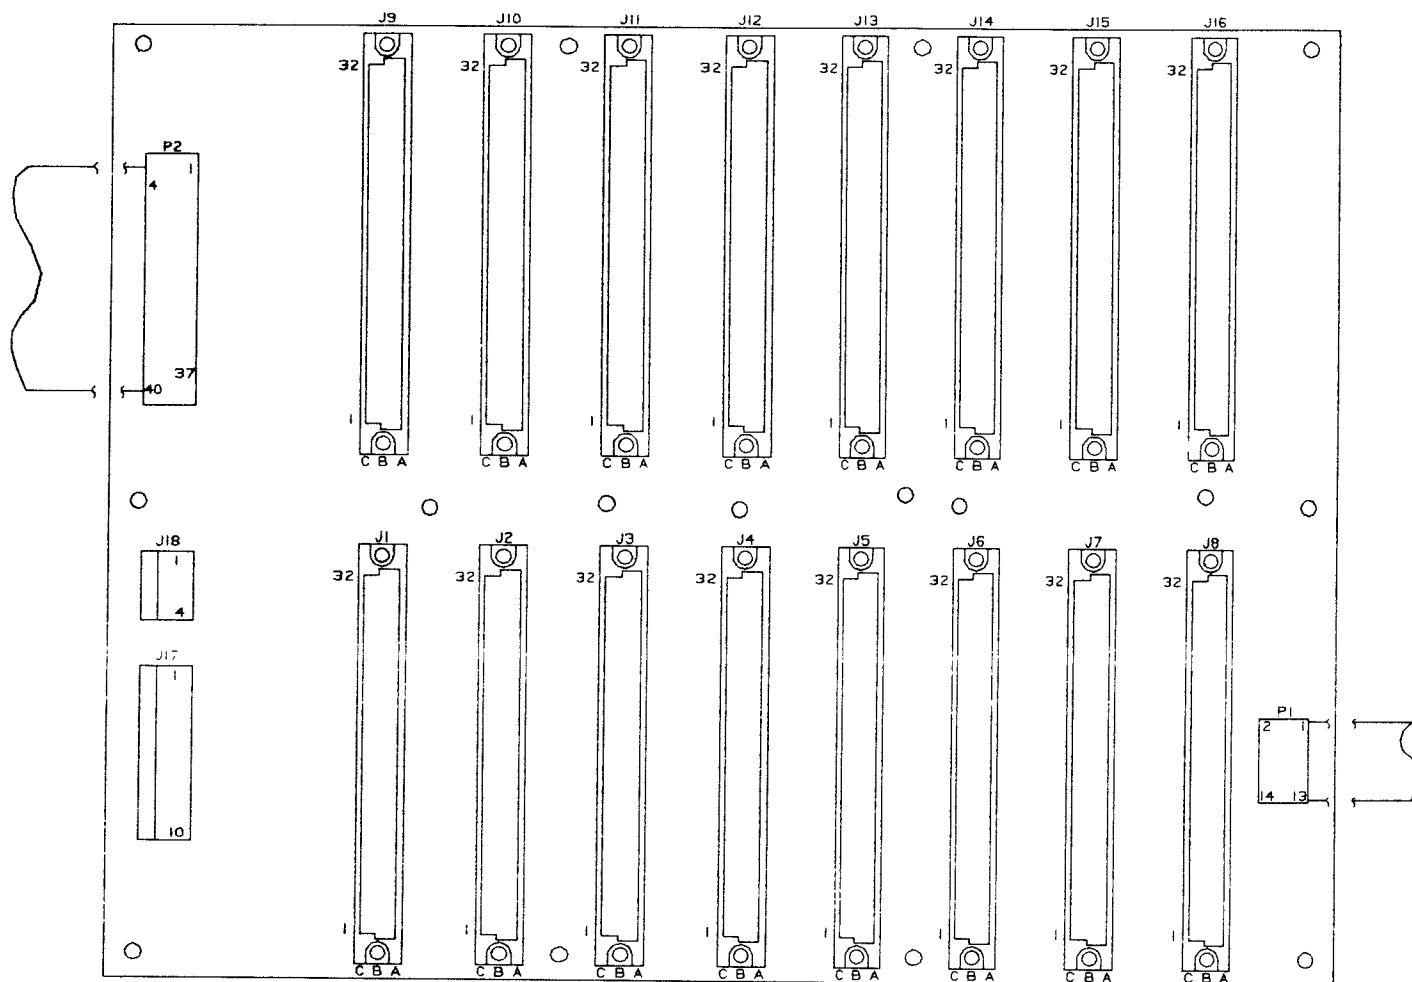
Interconnect PWB Assembly A10 Component Locations (10133-2900, Rev. C)
